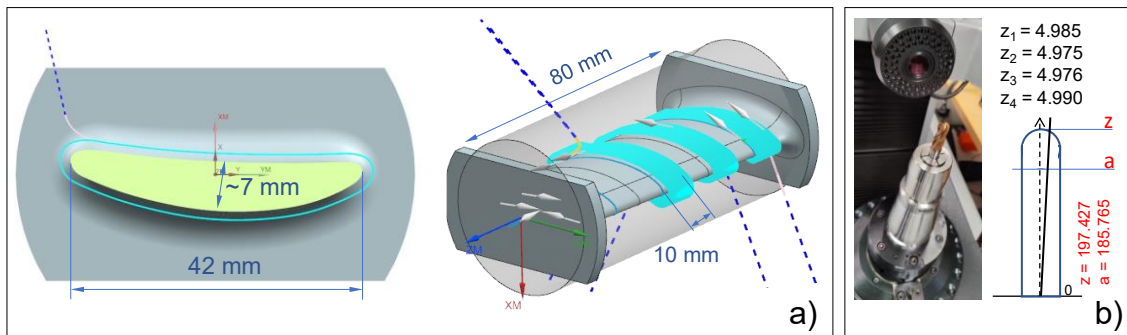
a) Part model and machining strategies. b) Tool with holder presetting.
